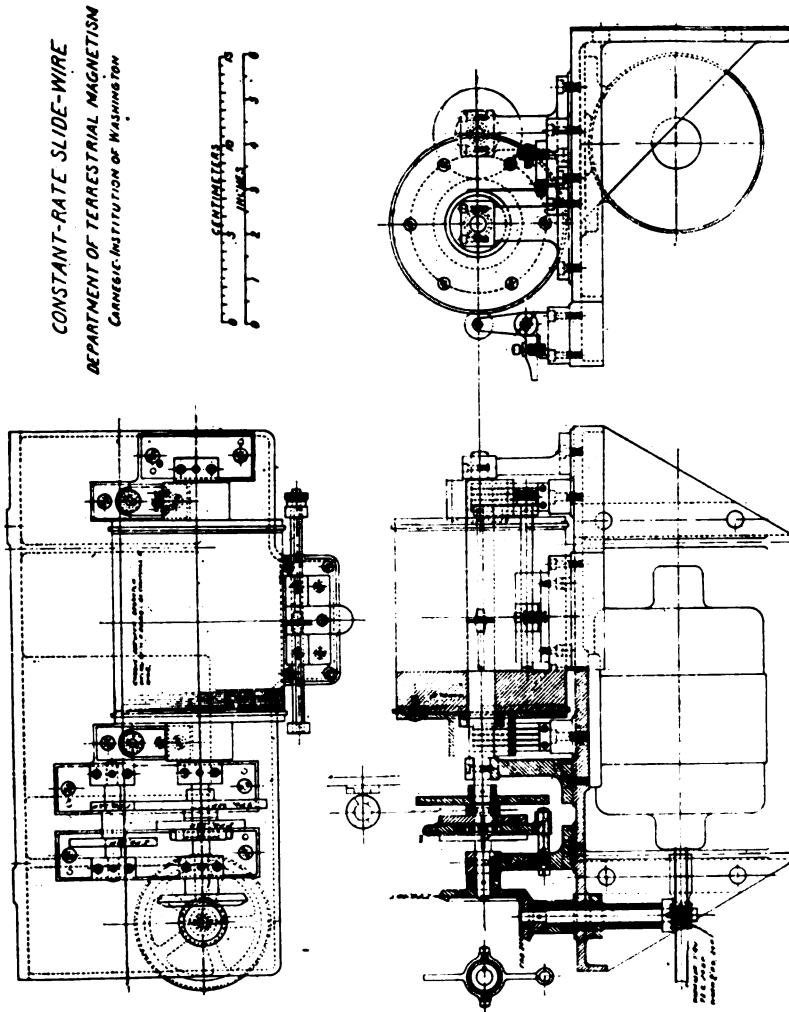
Plan and Elevations, Constant-Rate Slide-Wire
